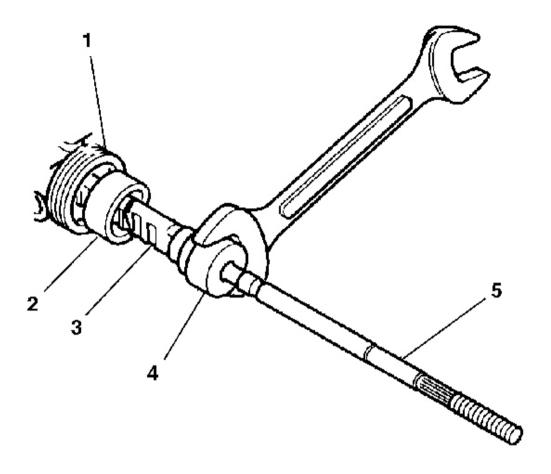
Inner Tie Rod, Shock Dampener & Rack Assembly Courtesy of GENERAL MOTORS CORP.
